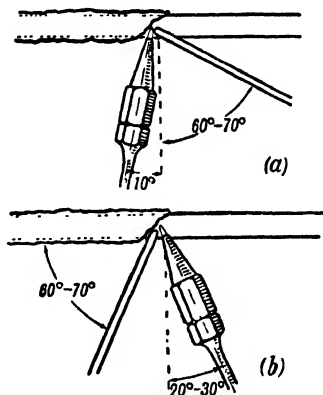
Leftward overhead welding. Flame is used to position metal melted from the rod into the molten pool
